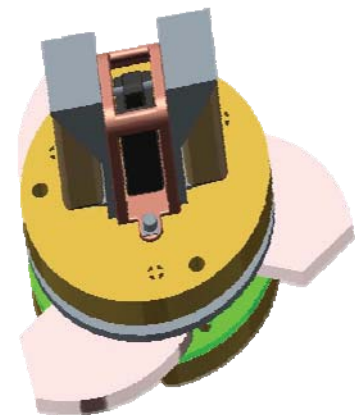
Trimetric View of Developed Mechanism (Fuselage and coupler sections not shown)
